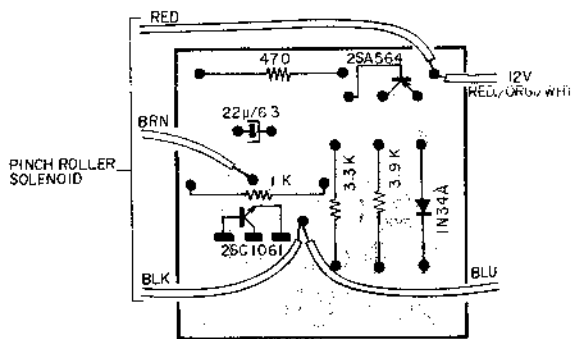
Pinch Roller Solenoid Control P.C. Board (PX-508)
